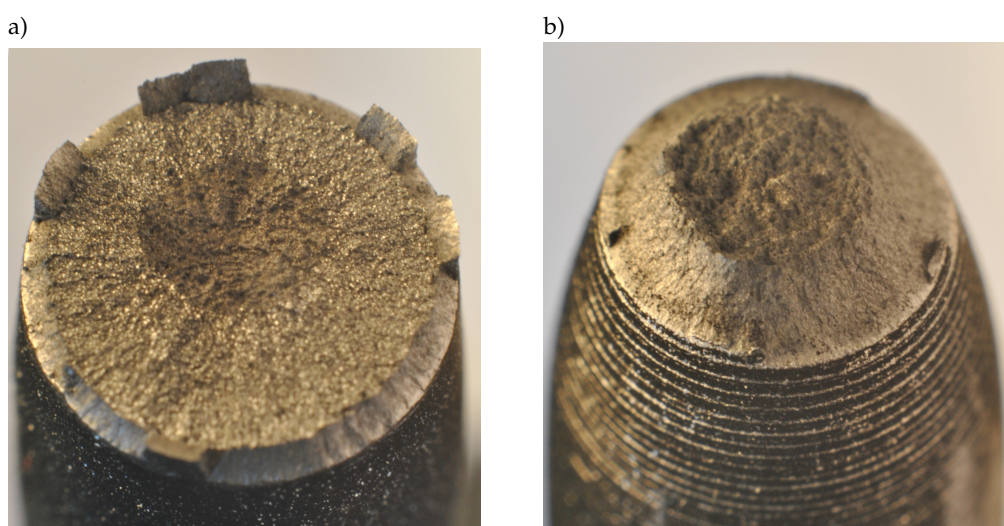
Fracture surfaces on 9mm-diameter specimens of two steels with different fracture patterns after testing under tension: a) Material 1; b) Material 2 [8].
